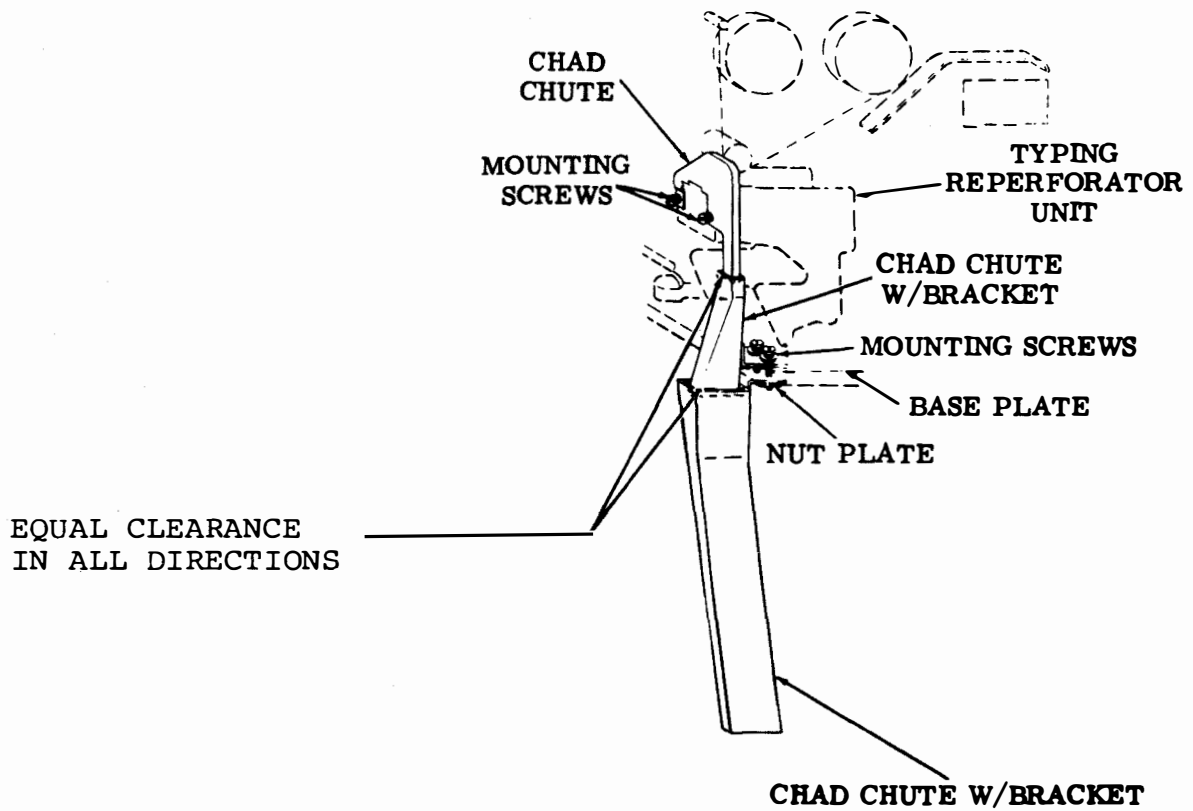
Chad Chute Assembly for Auxiliary Typing Reperforator, Front View
